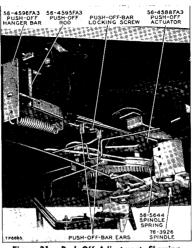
Push-Off Adjustment, Showing Push-Off Actuator in Contact with Roller on Cam Gear
